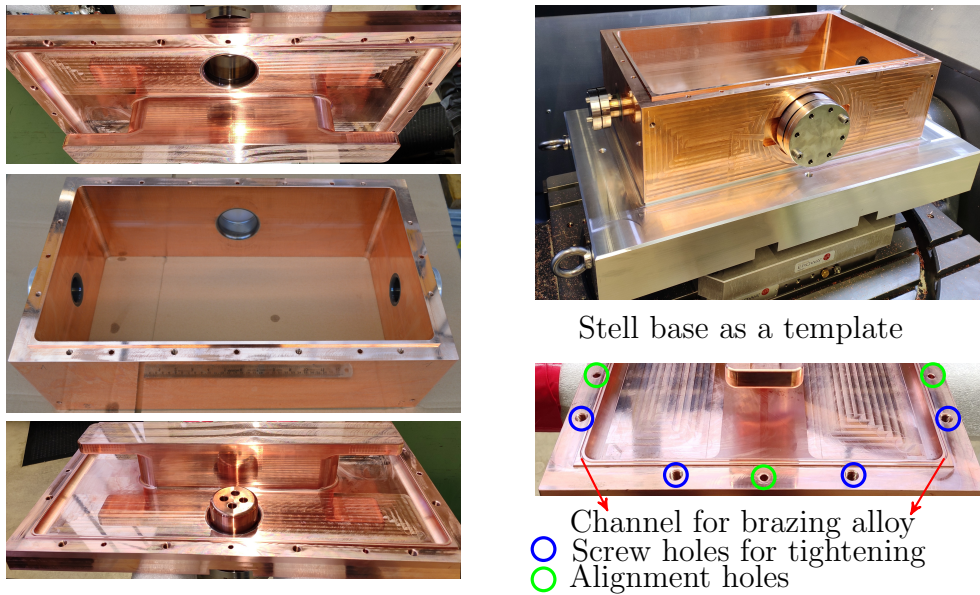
Three parts of the copper cavity were machined separately and the stainless steel base was used as a template for machining the parts.
